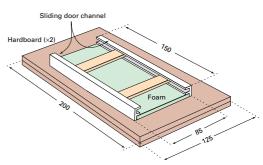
Component soldering made easy with this UB40 Jig from Peter Macbeath.
